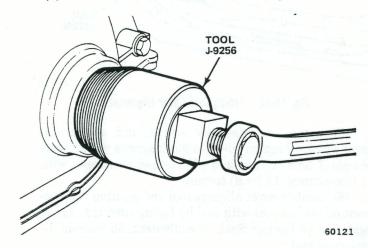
B-64 Timing Case Cover Oil Seai Removal
